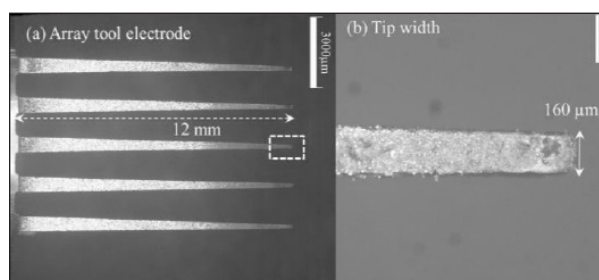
Tool electrode fabricated using W-EDM process; (a) array tool with 5 tips, (b) Enlarged view of a single tip.
